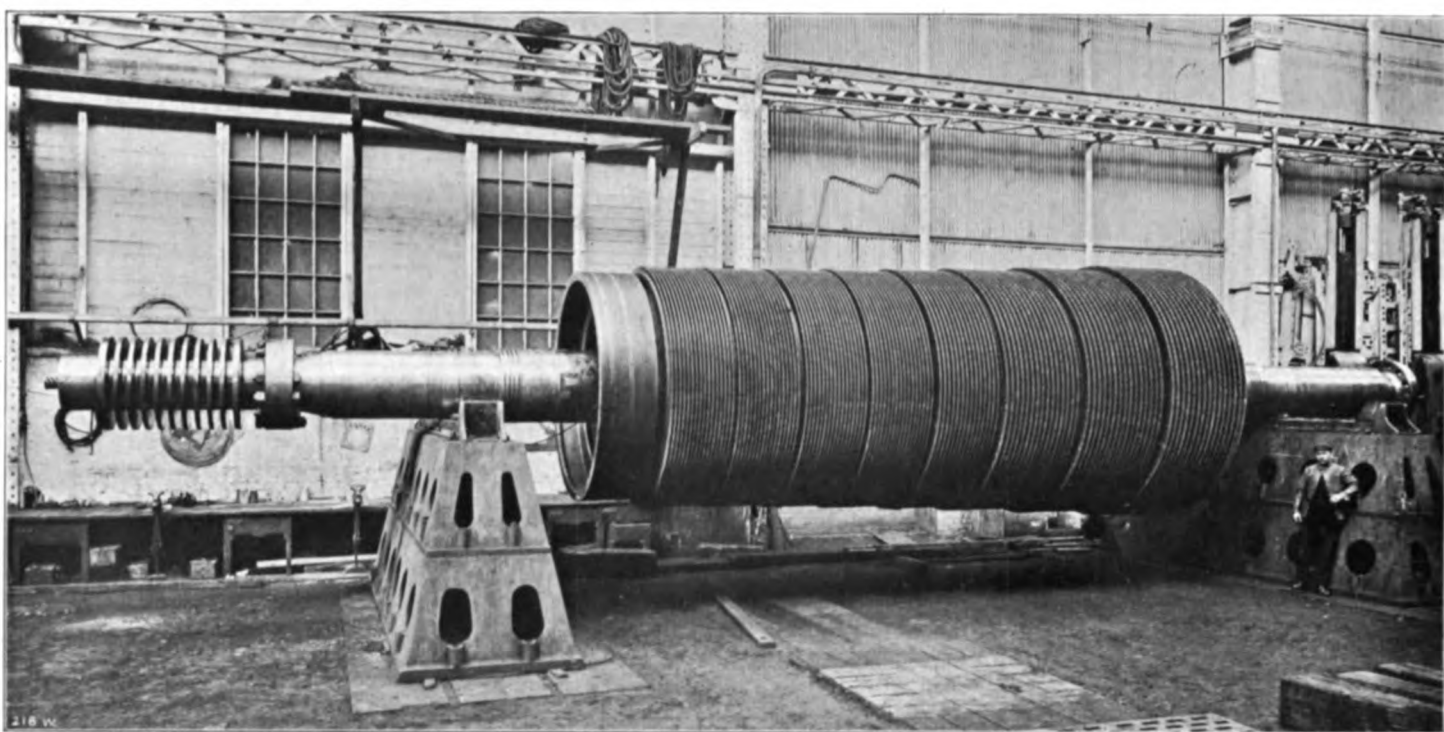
ROTOR AND THRUST-SHAFT OF HIGH-PRESSURE TURBINE.
